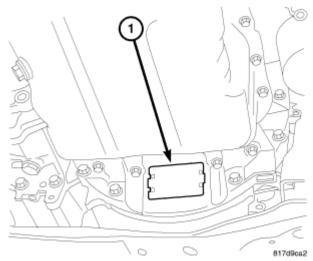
INSPECTION COVER Courtesy of CHRYSLER LLC
